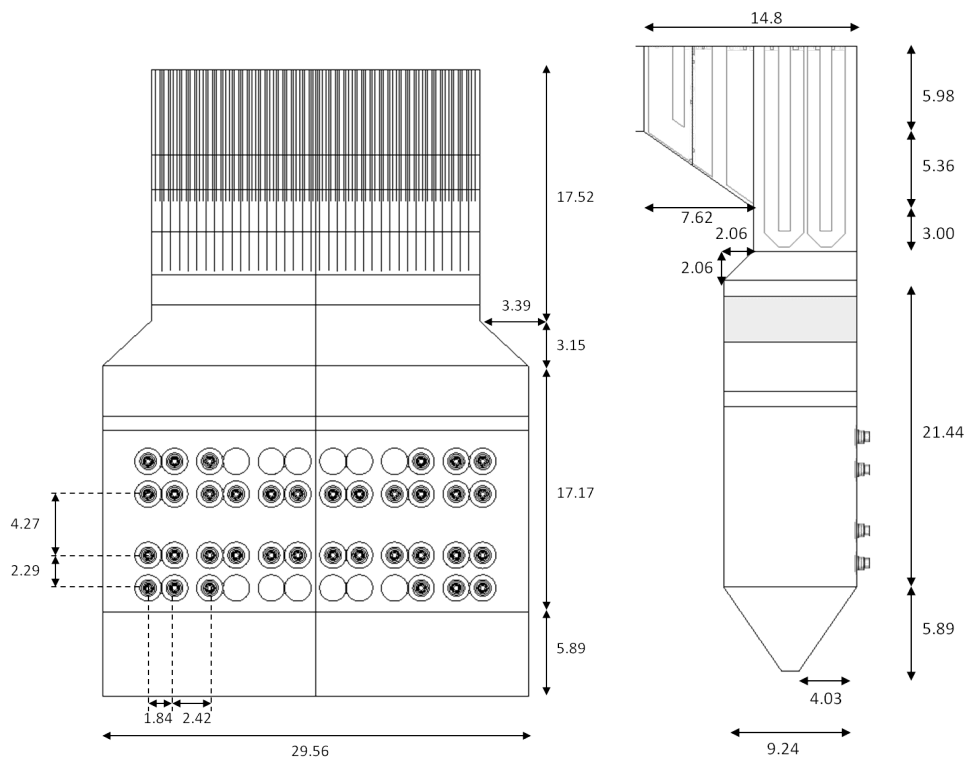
Dimensions (m) of the front and side view of the full-scale utility boiler.
